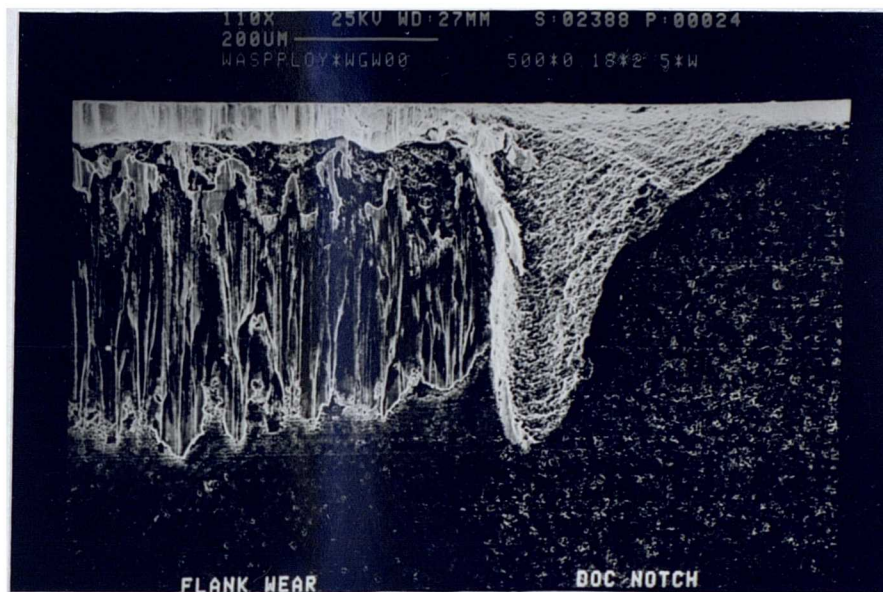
DOC notch and flank wear of WG300 used to machine Waspaloy (V=150m/min, F=0.18mm/rev, DOC=2.5mm, Wet)
